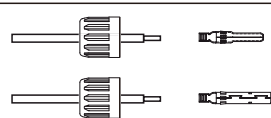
Insert the Wire into the Connector Cap nut and contact pin
